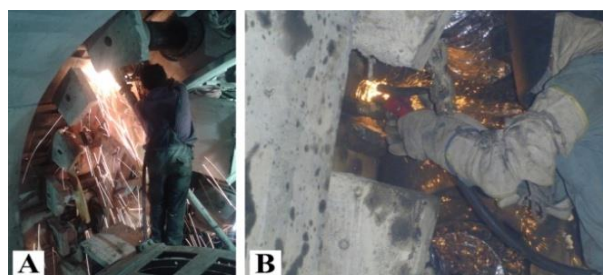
A- Cutting and preparing shields for welding. B- Welding two shields to each other.
